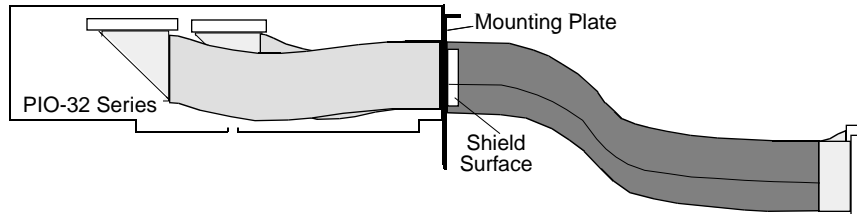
Cabling Reconnected, Placing Shield Surface in Line with Clamp
